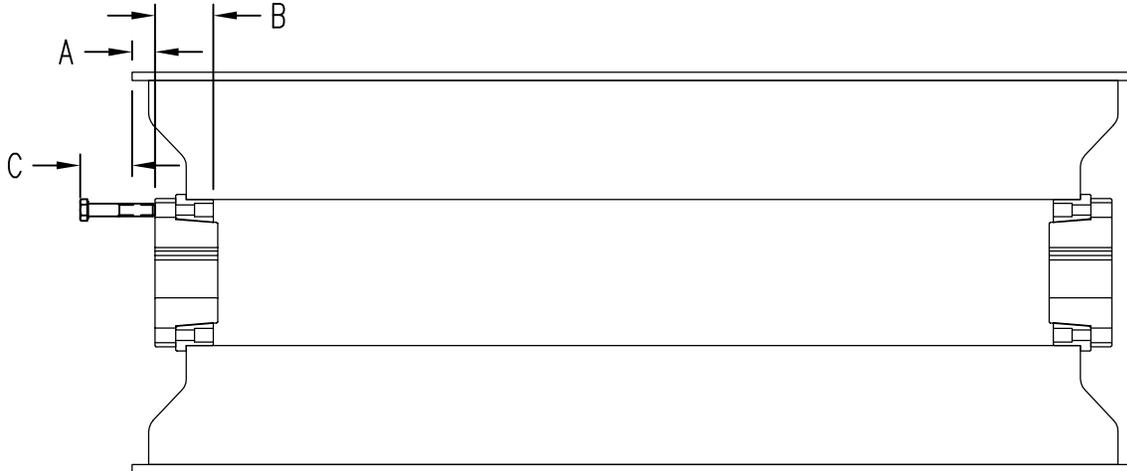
BUSHING LOCATION FOR WING PULLEYS
